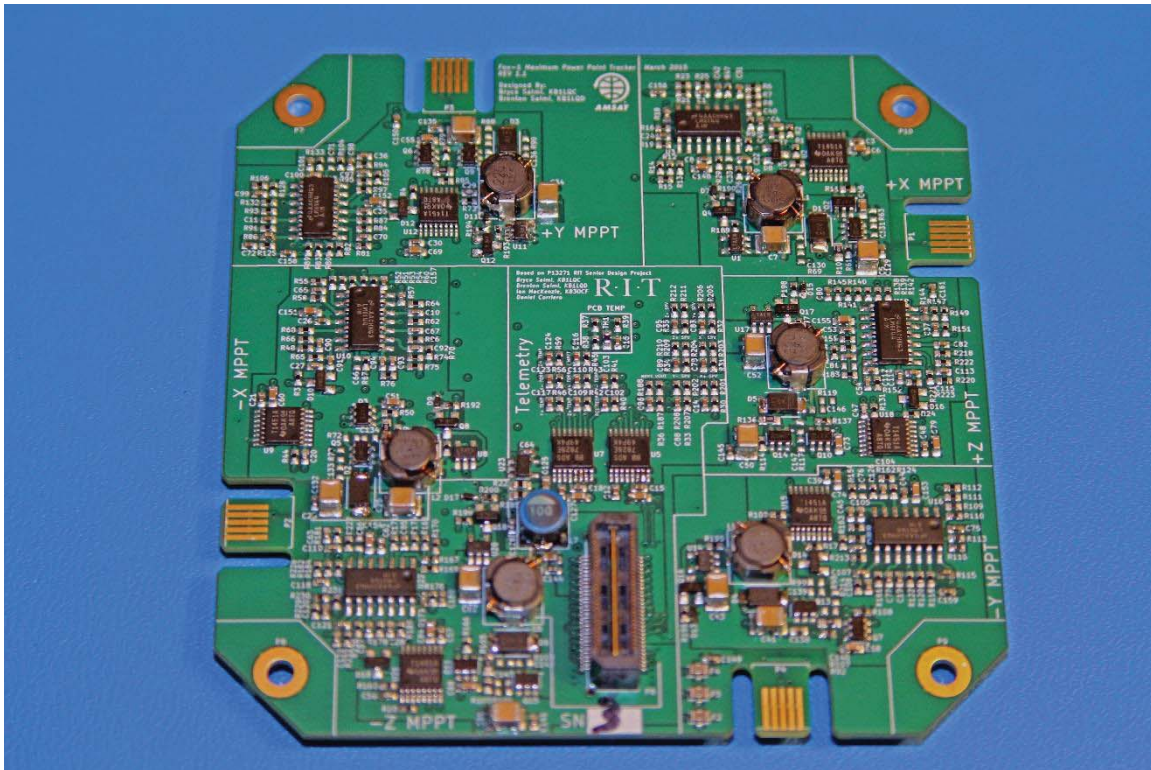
Fox-1 MPPT Rev 1.1 PCB with top layer visible, all components other than stacking connector located on top layer
